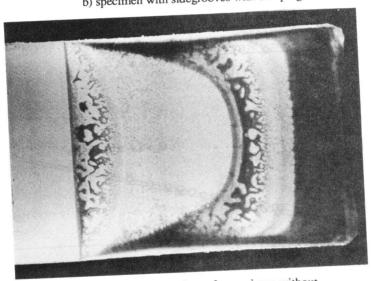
Photograph of the fracture surface of a specimen without sidegrooves (Lightmicroscoop 6.3x)
